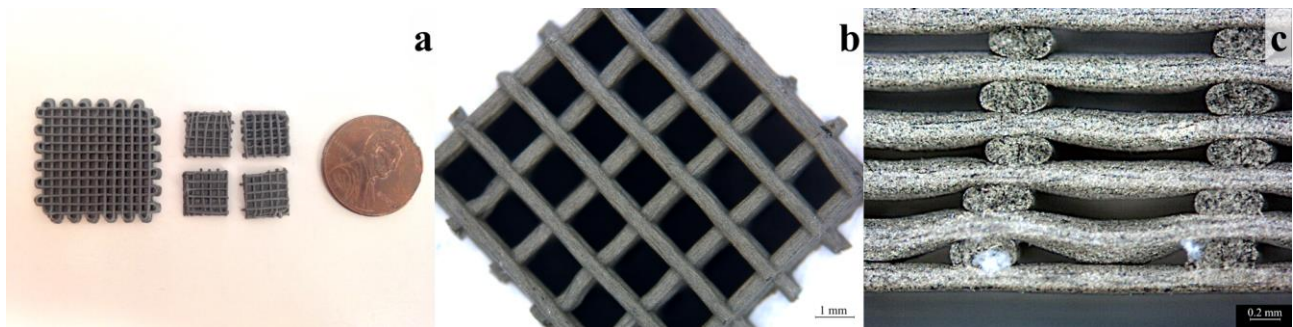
Samples for mechanical testing: (a) cutting of the CMC lattices; (b) close-up on a cut sample; (c) side microscope view of the sample, showing some deflection but also open porosity.
